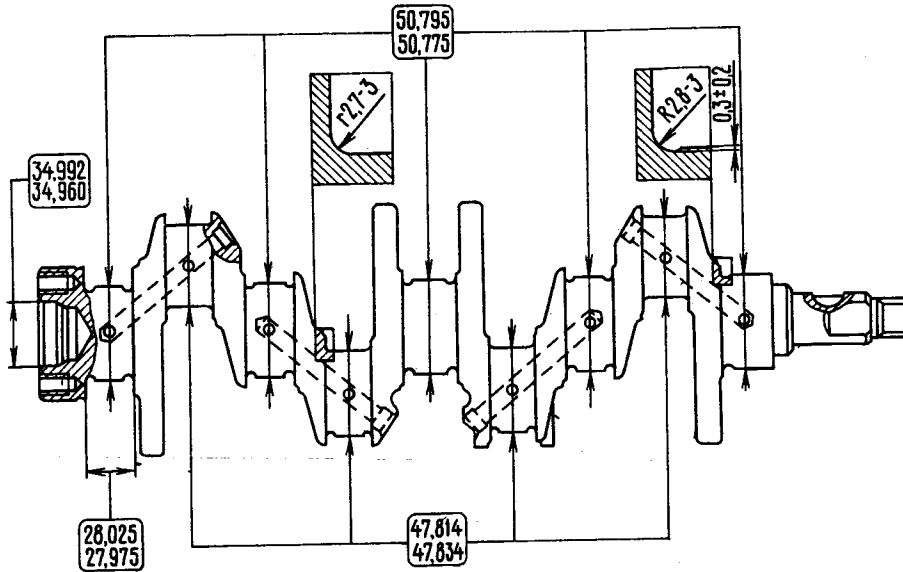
Main Dimensions of Crankshaft Main and Big-End Journals and Fillets
